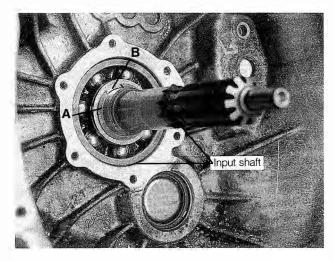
Input shaft circlip (A) and spacer (B) on Getrag 260 transmission.
